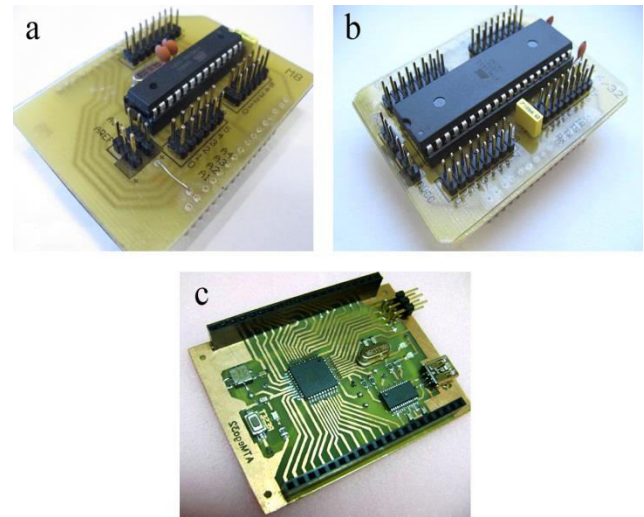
The exterior of irradiated printed circuit boards with ATmega8 and ATmega32A chips is installed in DIP and TQFP cases.
